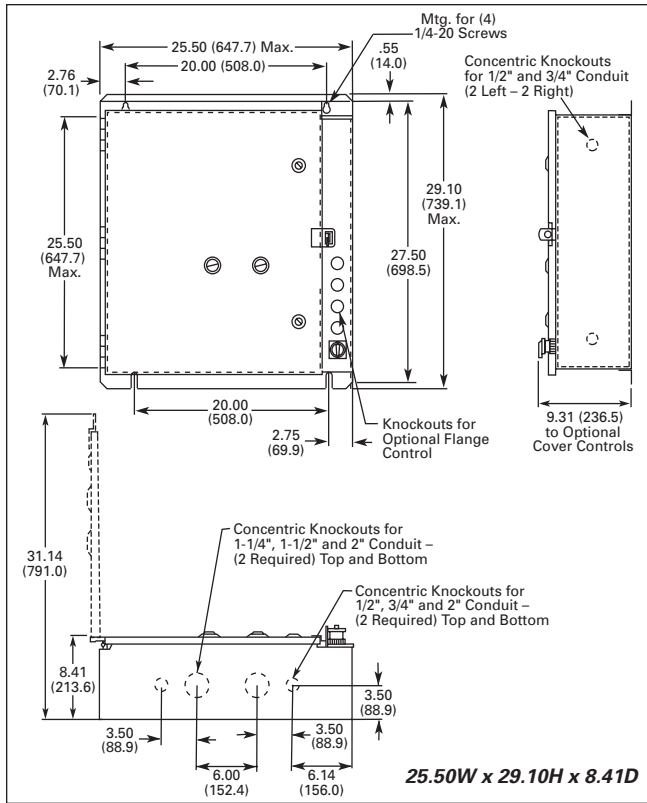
Box 9, Type 1 — Approximate Dimensions in Inches (mm)
